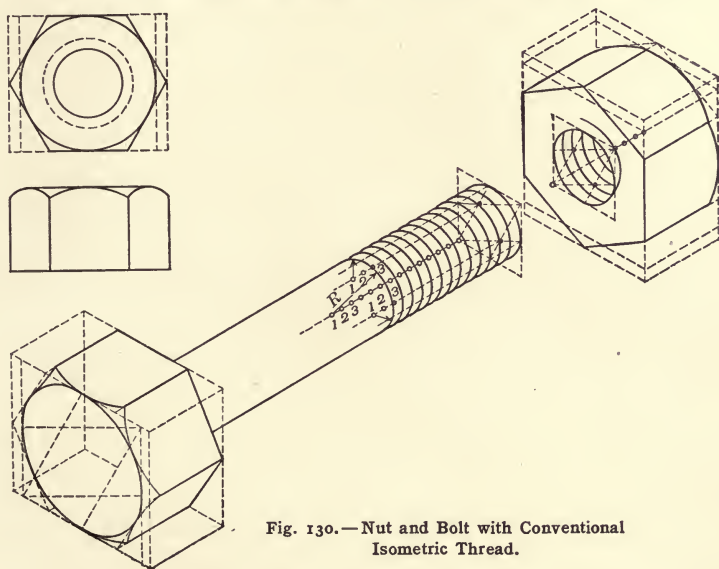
Nut and Bolt with Conventional Isometric Thread.
